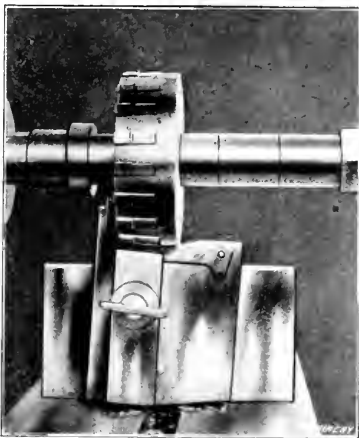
Milling the Internal Section of a Computing Machine Lever
